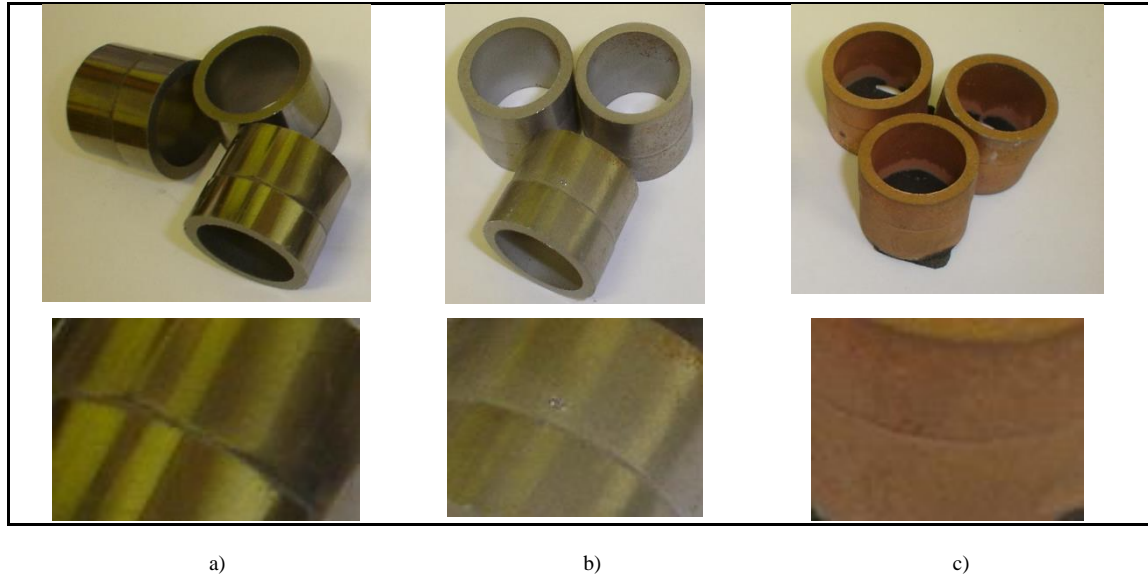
Iron-copper details and macrophotography of surfaces after compacting (a), sintering (b) and infiltration (c): outer diameter 30 mm, inner diameter 26 mm.
